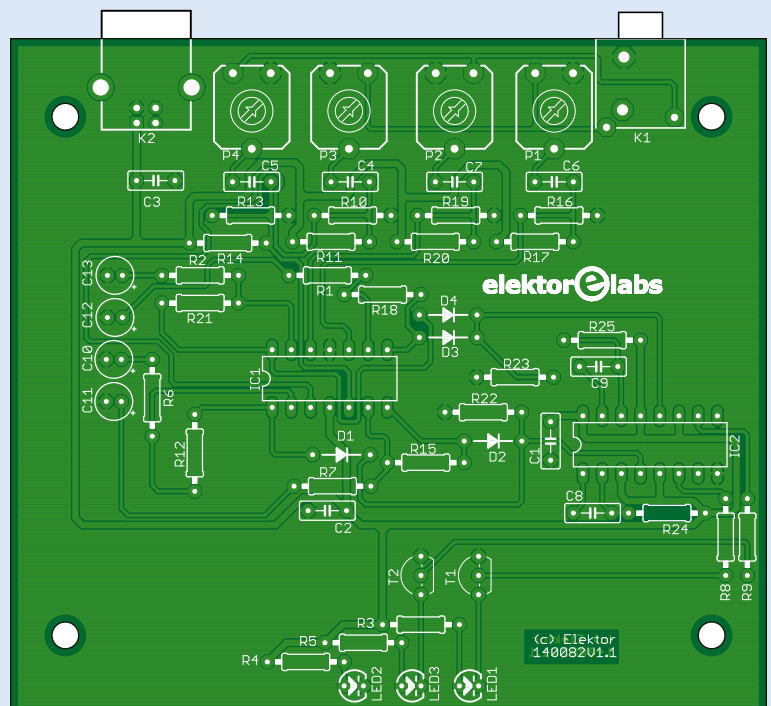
The circuit board for the signal level indicator is generously sized so that everything is easily fitted and soldered.
